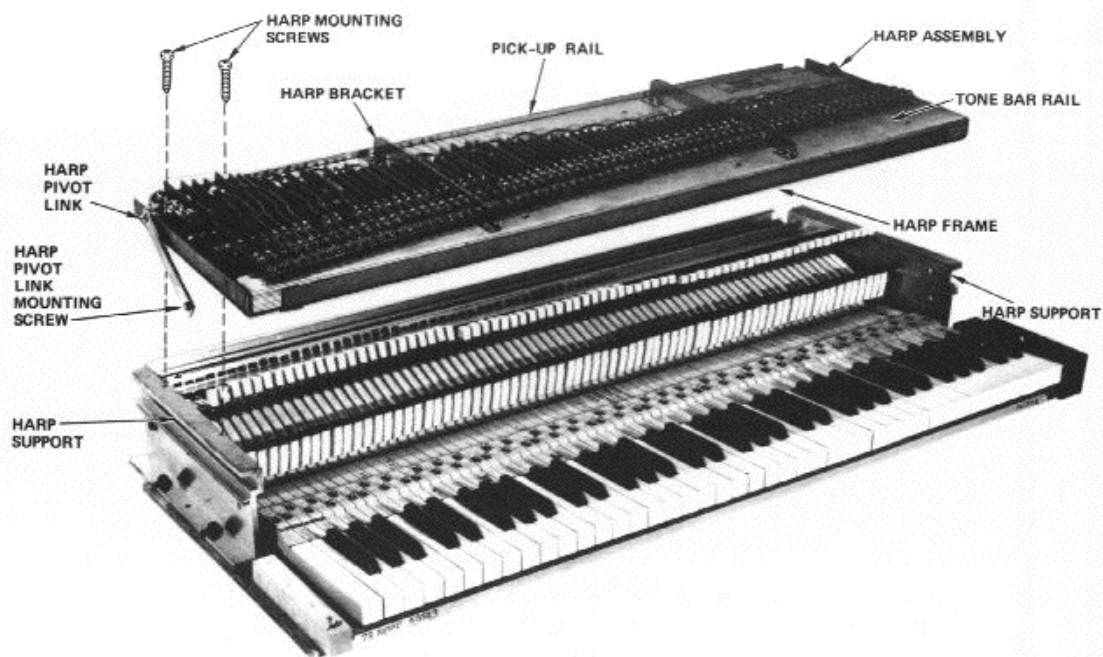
RHODES Harp/Action Assembly — Exploded View
